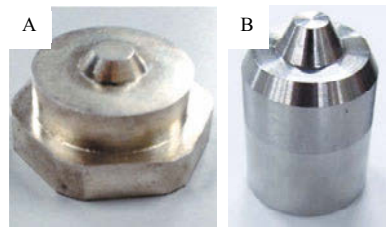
(A) 2 mm (B) 5 mm probe length tool used for FSW.
